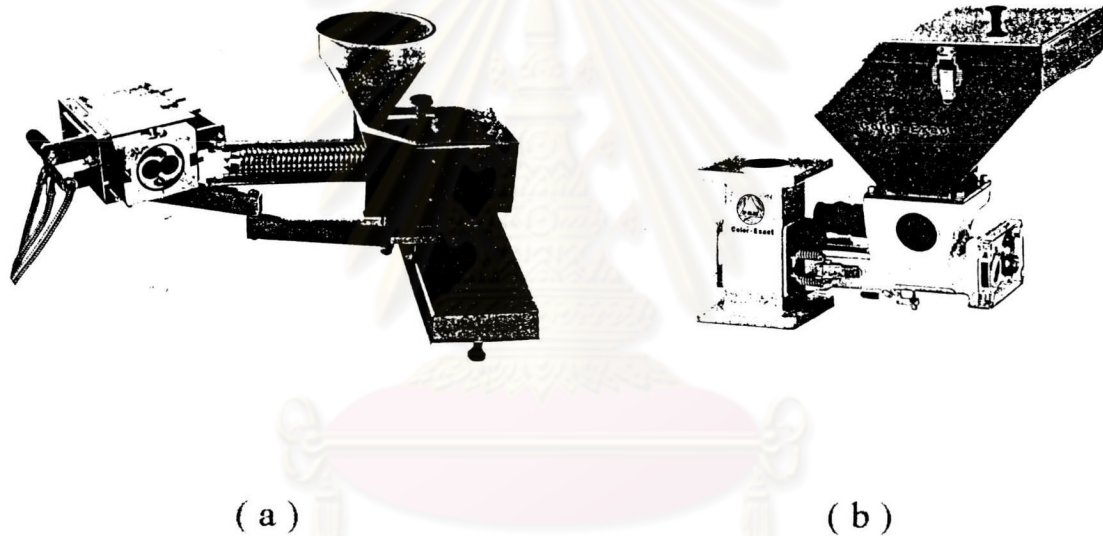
The twin-screw extruder the feeding mechanism with (a) the barrel and screw extruder and (b) screw feeder.
